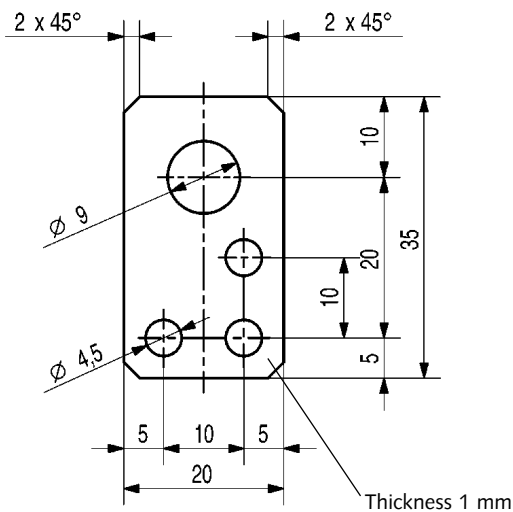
Mounting plate (Mat. No. 3.520.328)
